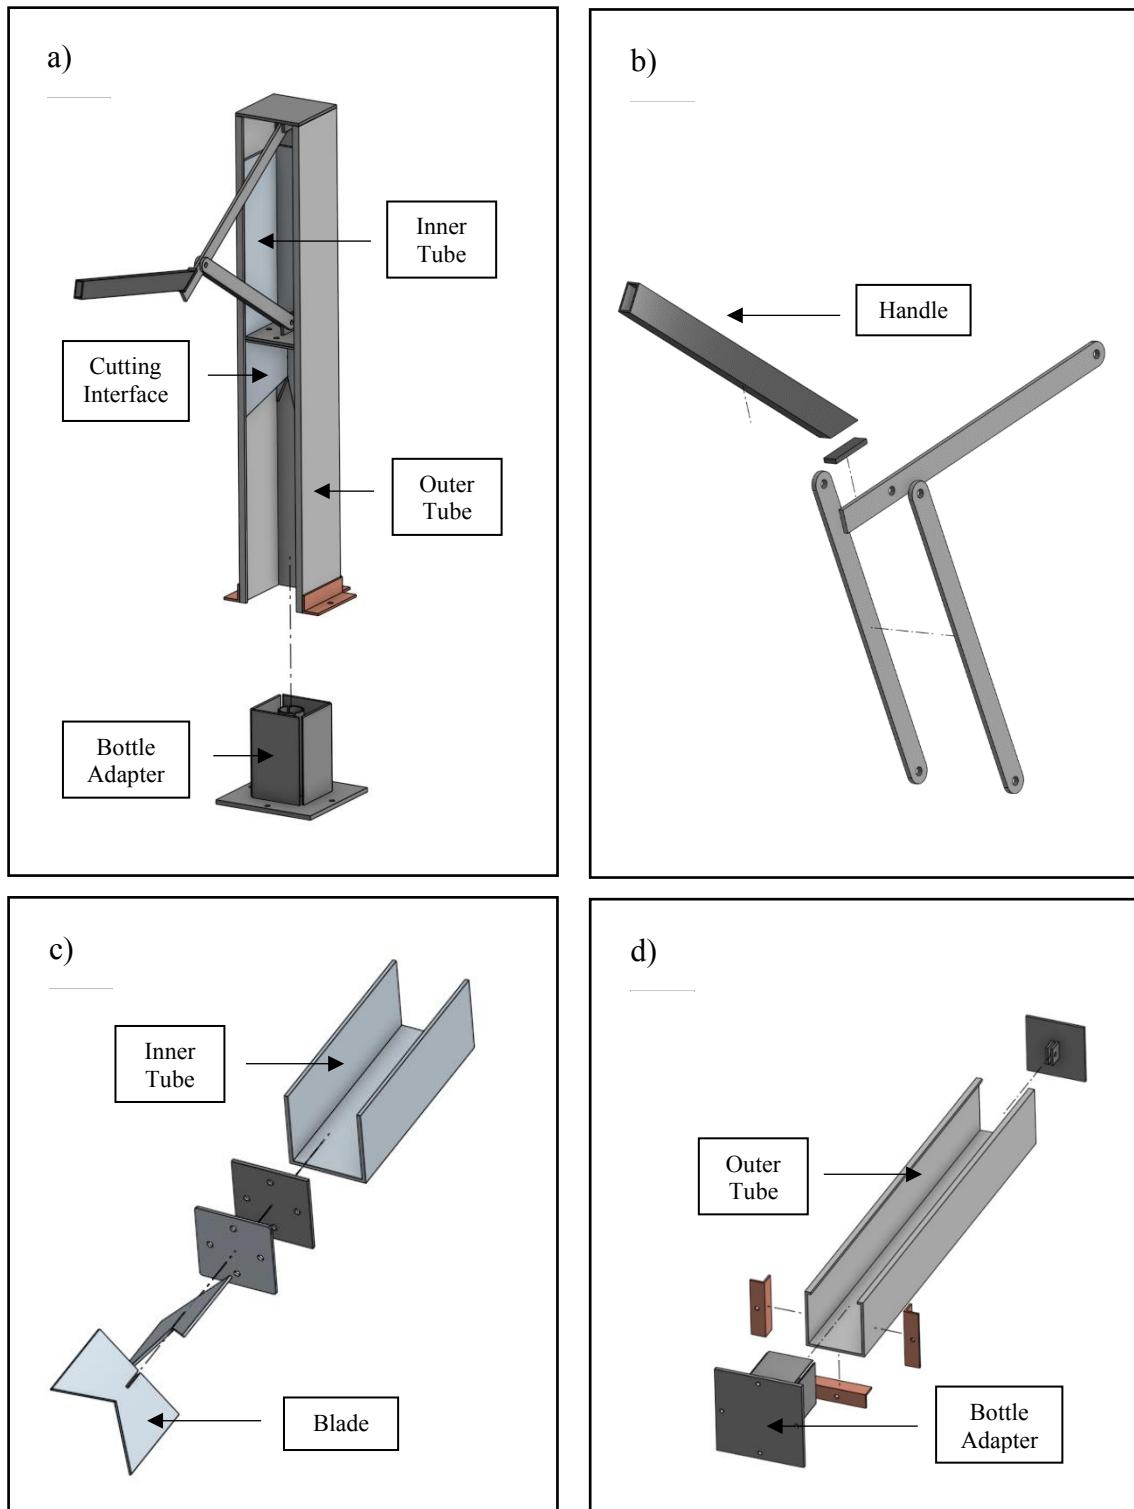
3D- representation of the cutting module: a) Complete Assembly, b) Explosion view of the handle and joints, c) Explosion view of the inner tube with blades attached, d) Explosion view of the outer tube with the bottle adapter attached
